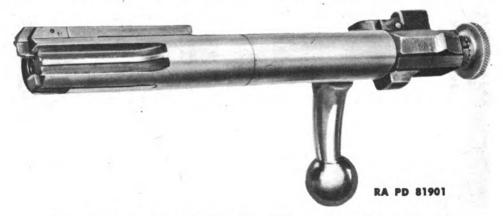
Bolt With Firing Mechanism Assembly of U.S. Rifle, Cal. .22, M2
